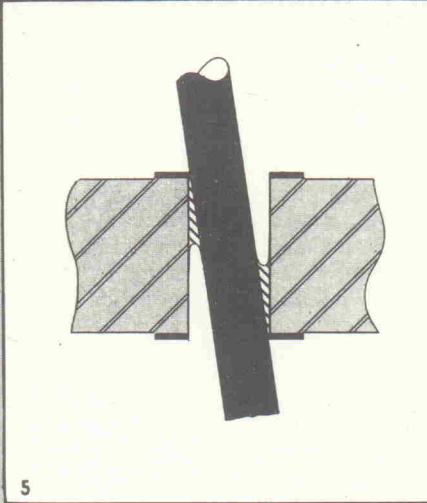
Usual results of attempts to remove solder from a through-plated hole.
